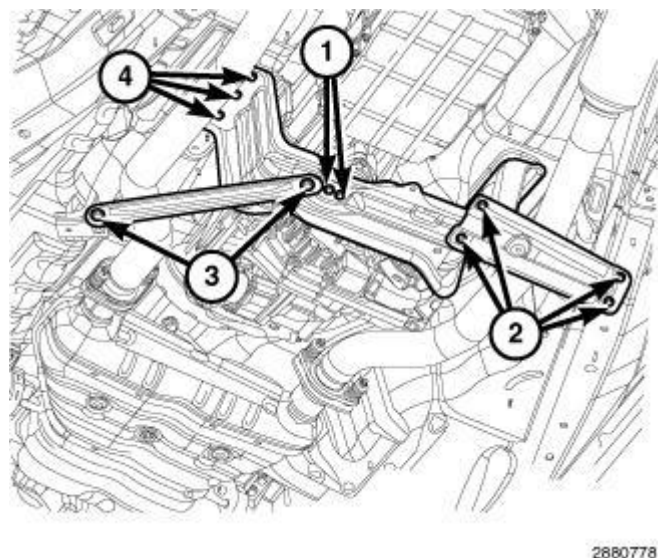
Rear Engine Mount Isolator, Transmission Crossmember Support Brackets & Bolts
